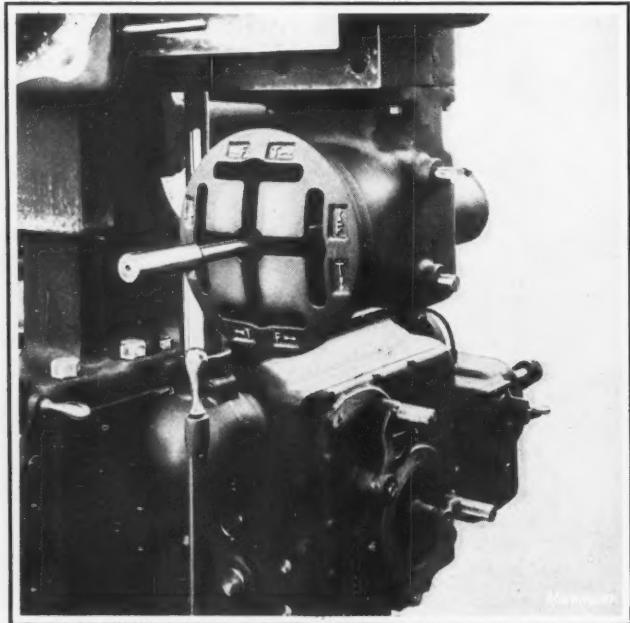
Close-up View of the Colburn Single-lever Control for Head Feeds and Traverses
